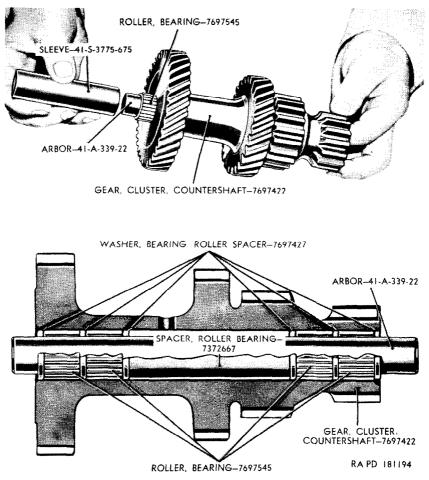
Installing transmission countershaft cluster gear bearing rollers.
